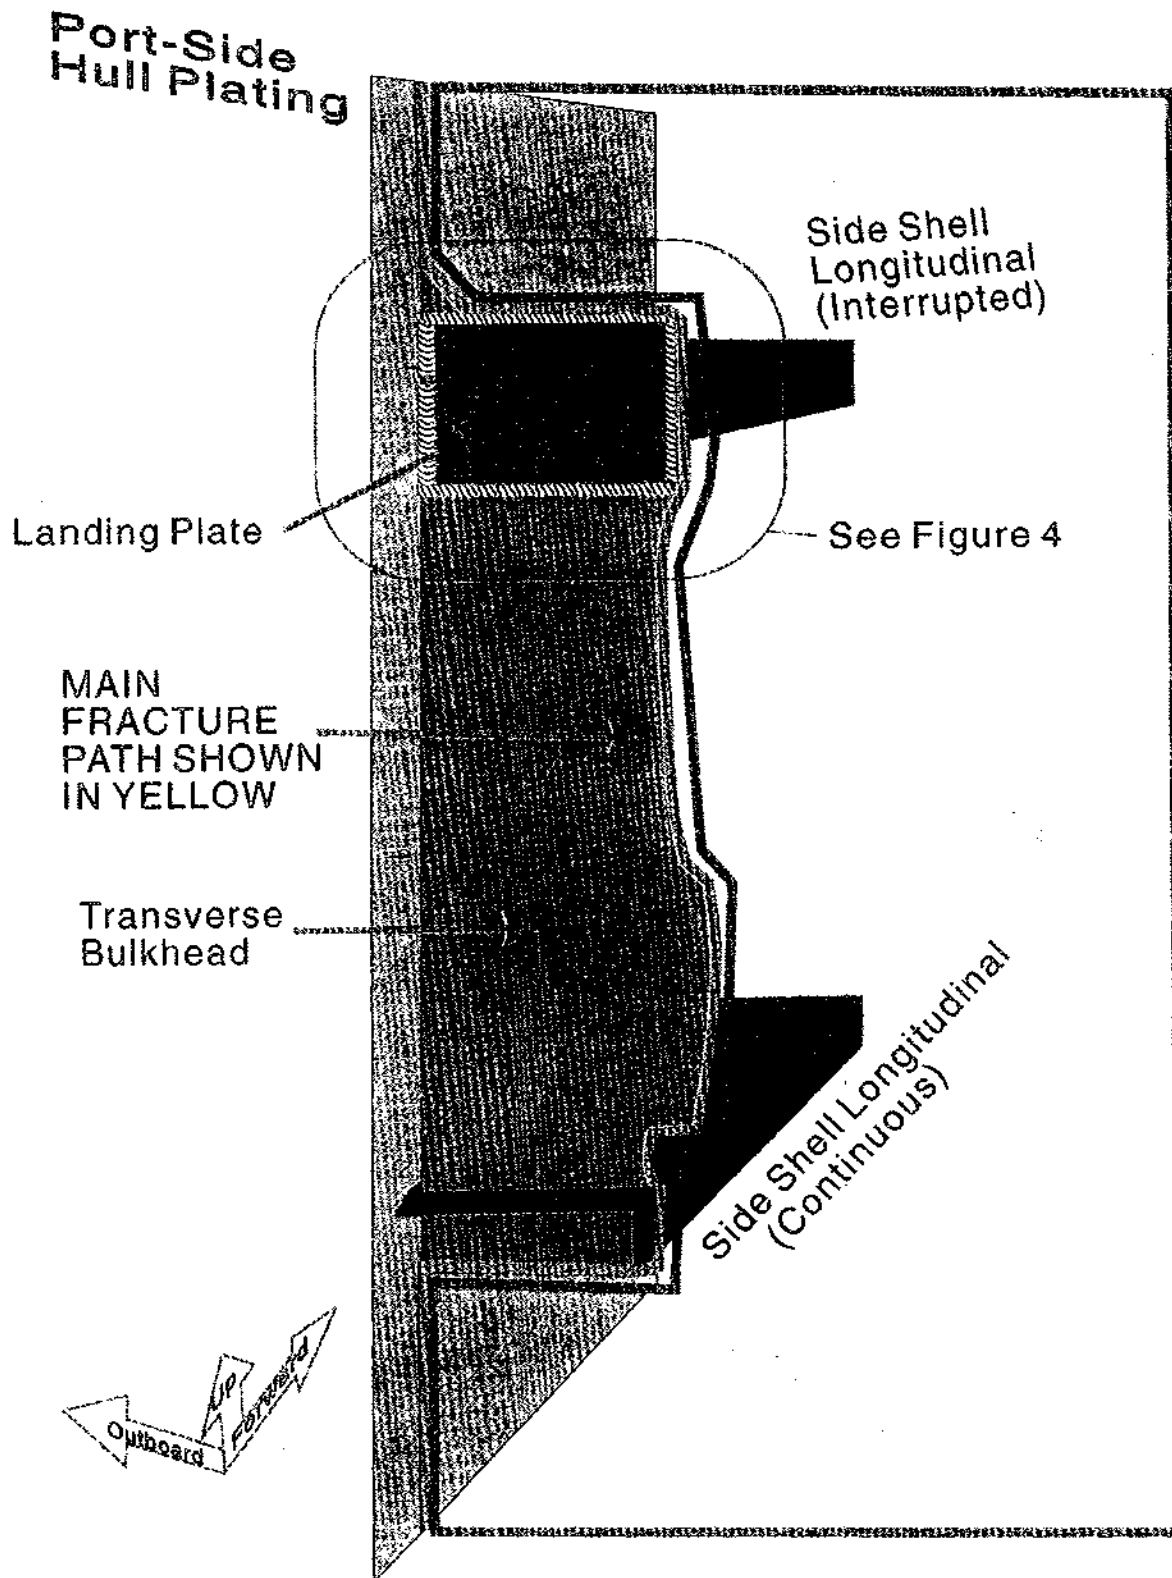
A drawing illustrating the arrangement of components. The main fracture path through the transverse bulkhead is denoted by the yellow line. The larger inboard piece of the bulkhead is shown as an outline for clarity. View is not to scale and shown without deformation.
